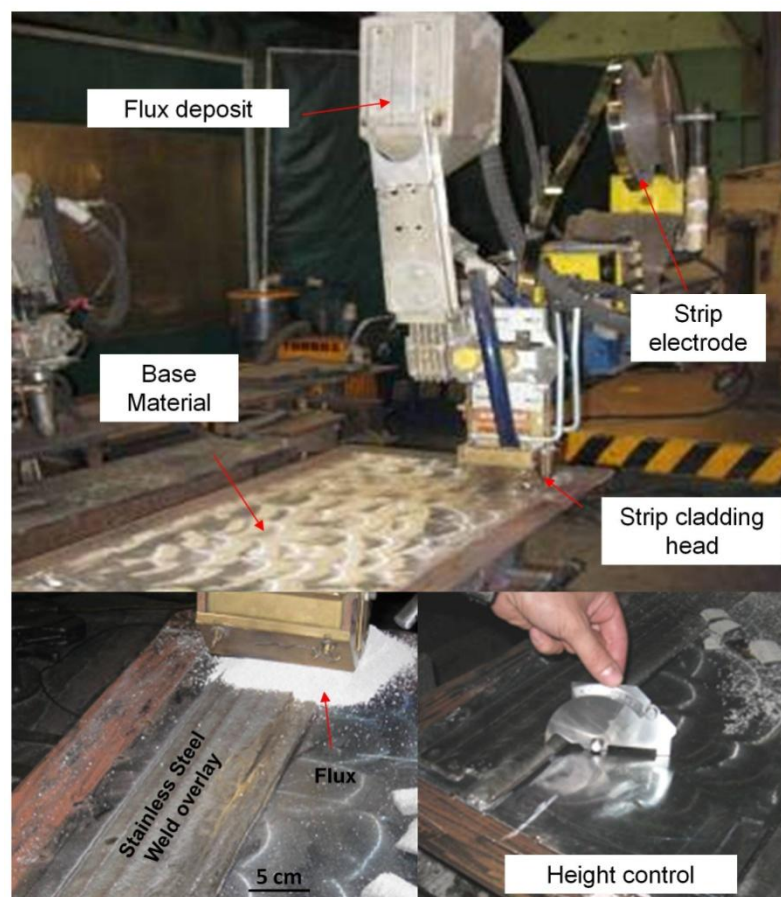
Fabrication of weld overlays by SAW process with strip electrodes
